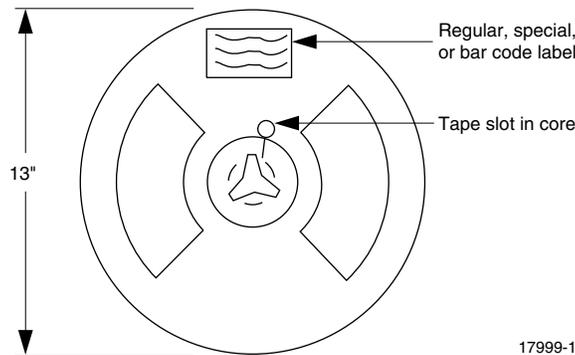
Tape and Reel Shipping Medium (1000 units per reel)
